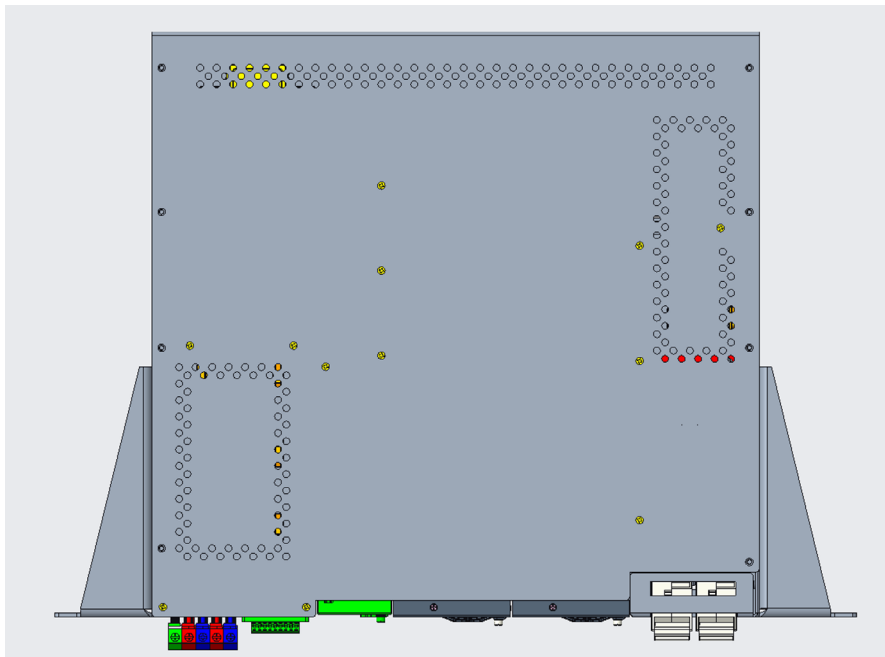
Isometric View: Solar Add-On Shelf with 23-inch Mounting Brackets
